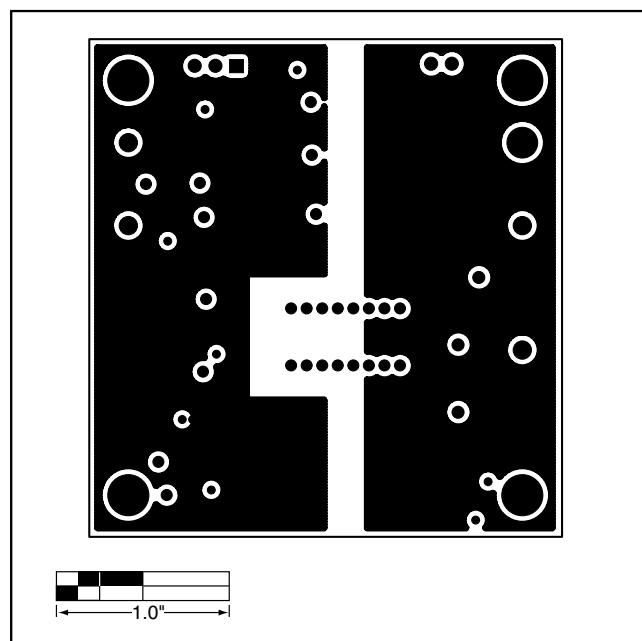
MAX5015 EV Kit PCB Layout—Inner Layer, Ground Plane
